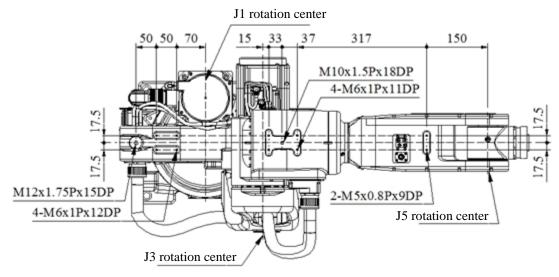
(b) RA610-1355-GB Mounting surfaces on the robot RT610-1355-GB Mounting surfaces on the robot
